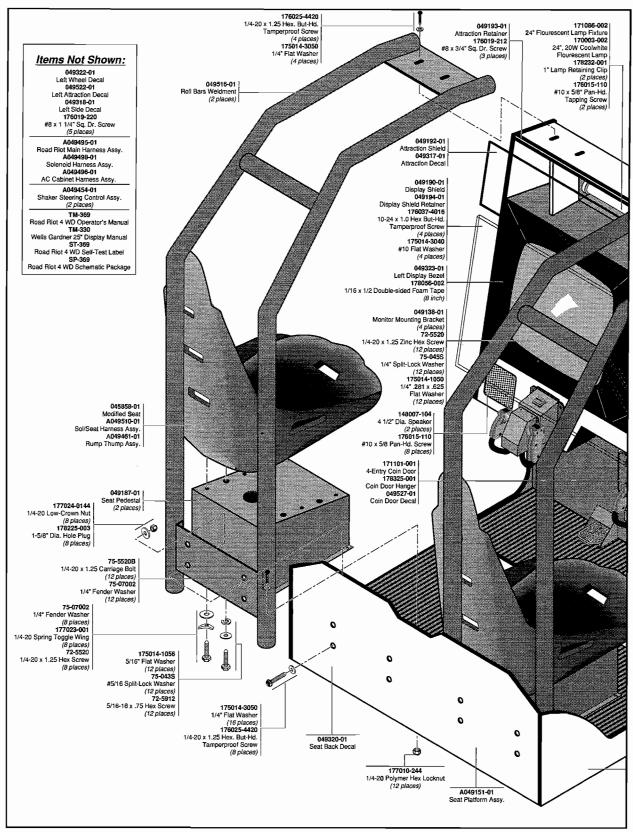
Cabinet-Mounted Assemblies, Front View A049150-01 C
